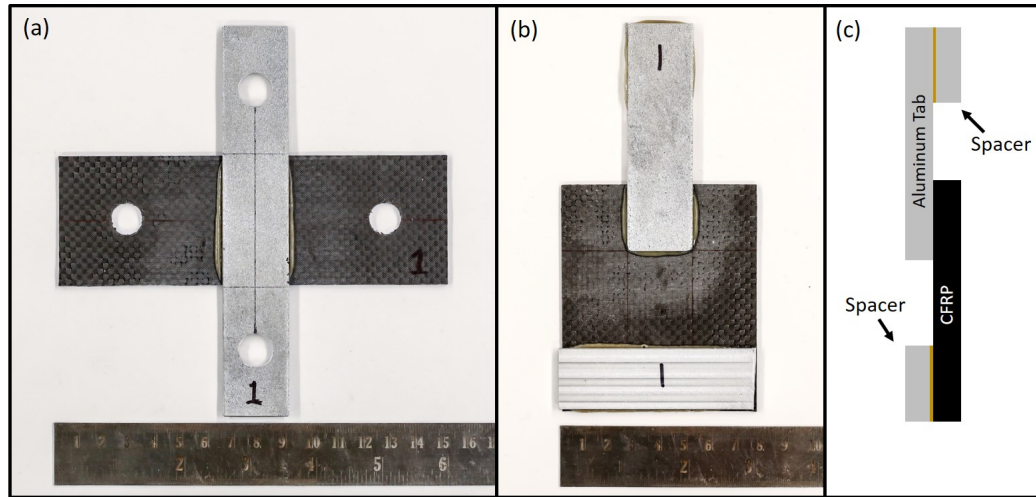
Completed adhesive joints. (a) Adhesive cross tensile joint. (b) Adhesive tensile joint. (c) Side profile of adhesive tensile joint. The specimen thickness is exaggerated for clarity.
